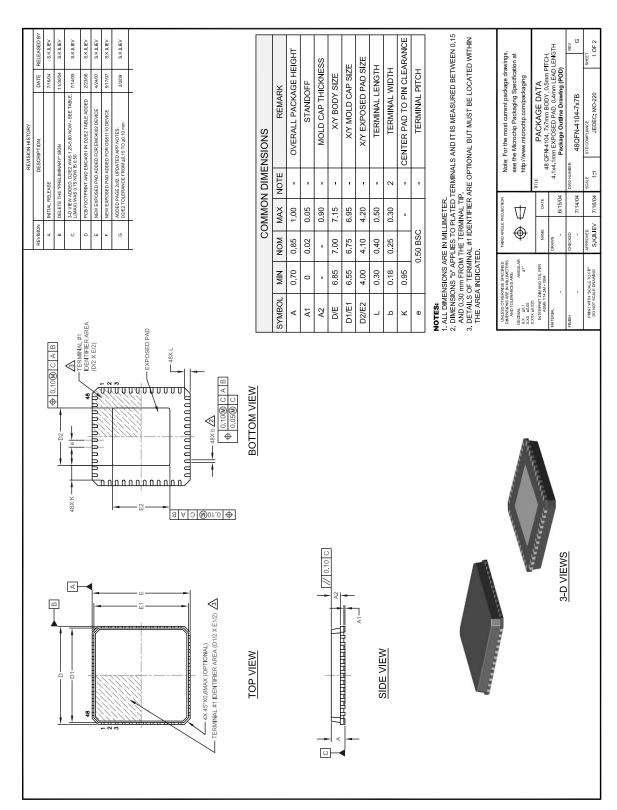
PACKAGE OUTLINE: 48-PIN QFN, 7X7 MM BODY (2 OF 2)
